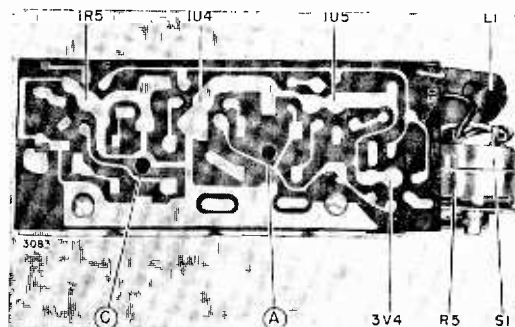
Underside view of a printed chassis (Admiral 4X1 battery portable), showing routing of printed leads.
